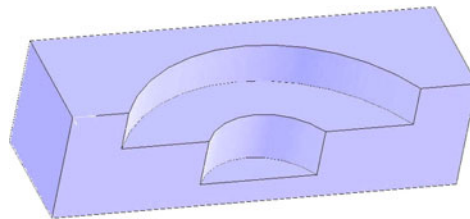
010-1117 Wrist Clamp Tool, 1 of 2
